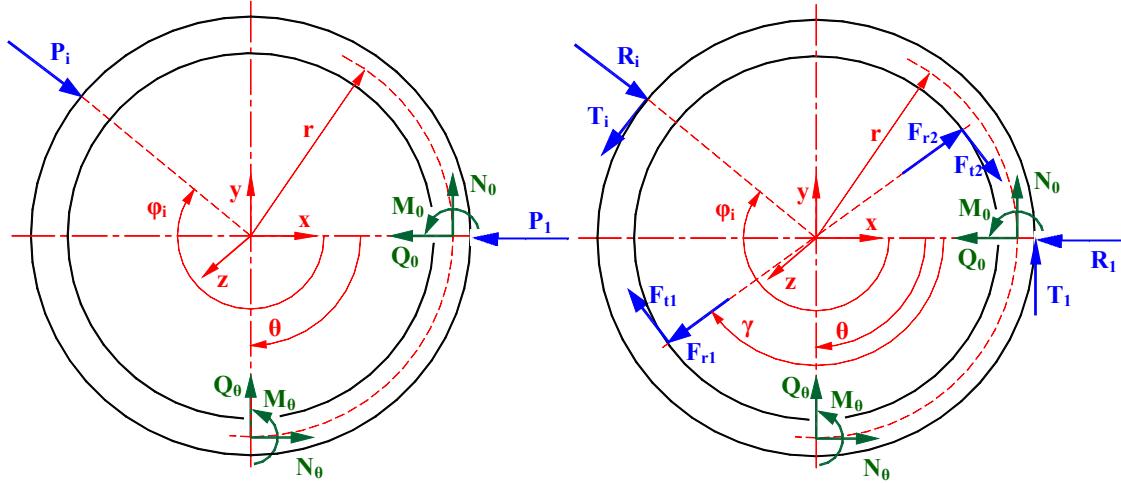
Clamping element loading in ring-shaped work piece clamping
